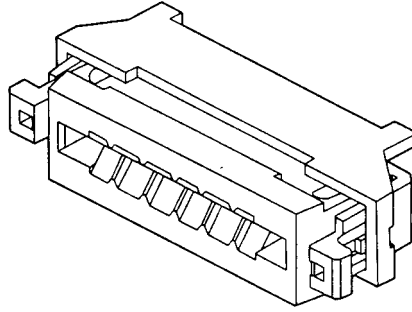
Right angle ZIF flex circuit-to-board connector 90500 by Molex® [277].
